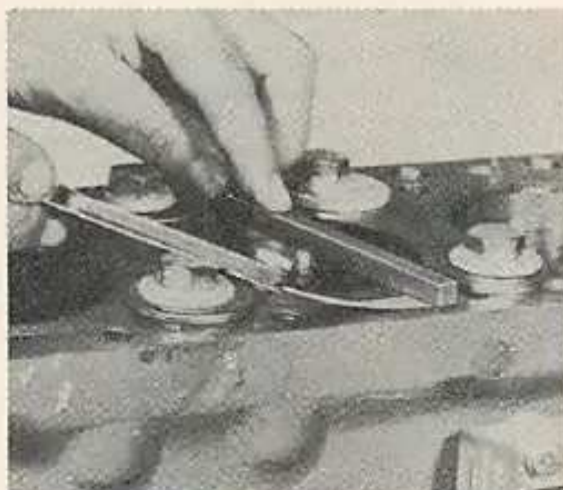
Checking sleeve protrusion about machined surface of cylinder block. Note that sleeve is clamped in place by short cap screws and spacer washers.
